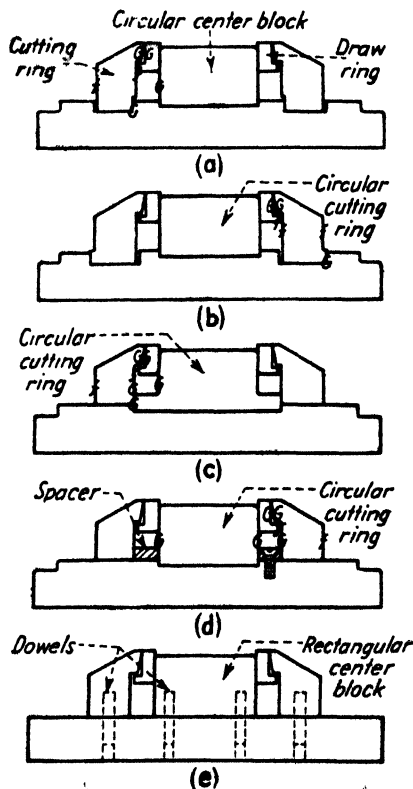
Views (a) to (d) show alternative methods of maintaining alinement in circular dies. View (e) shows a rectangular die with a doweled center block and cutting ring.
